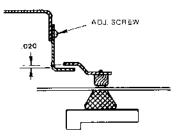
HEAD LOAD BAIL TO HEAD LOAD ARM ADJUSTMENT (OLD STYLE)
